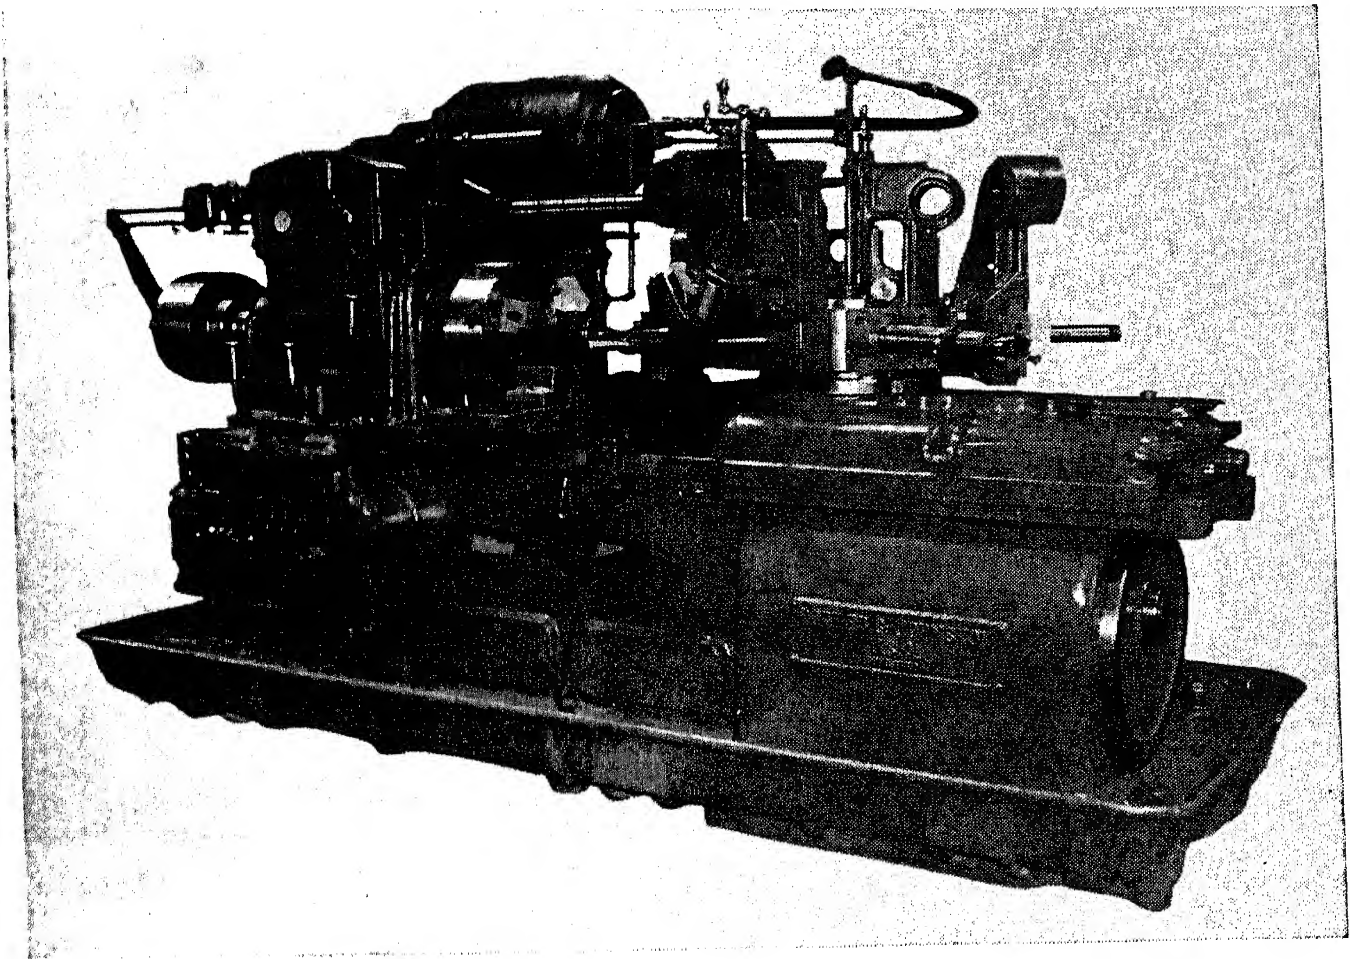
An automatic turret lathe. (Courtesy Potter and Johnston Co.)
